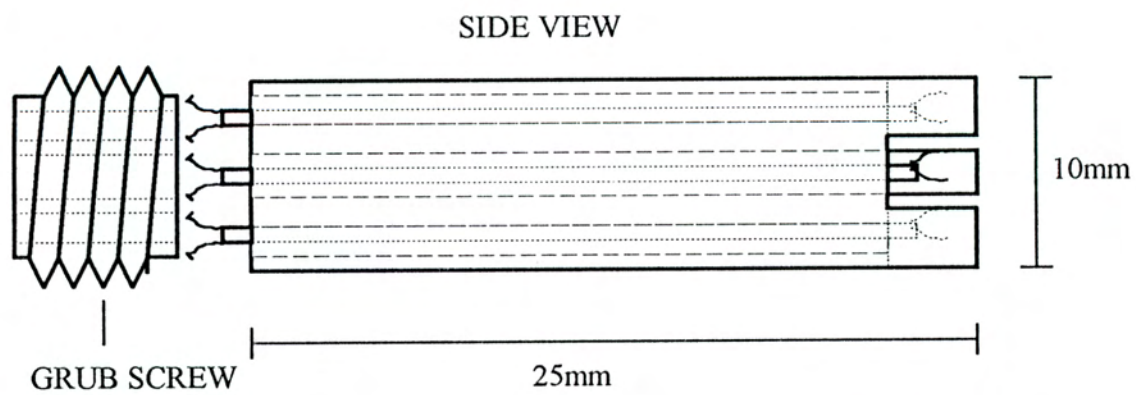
Side view of the four bore support tube assembly with the two bore insulators protruding from the end of the four bore support tube into the grub screw of loading mechanism.
